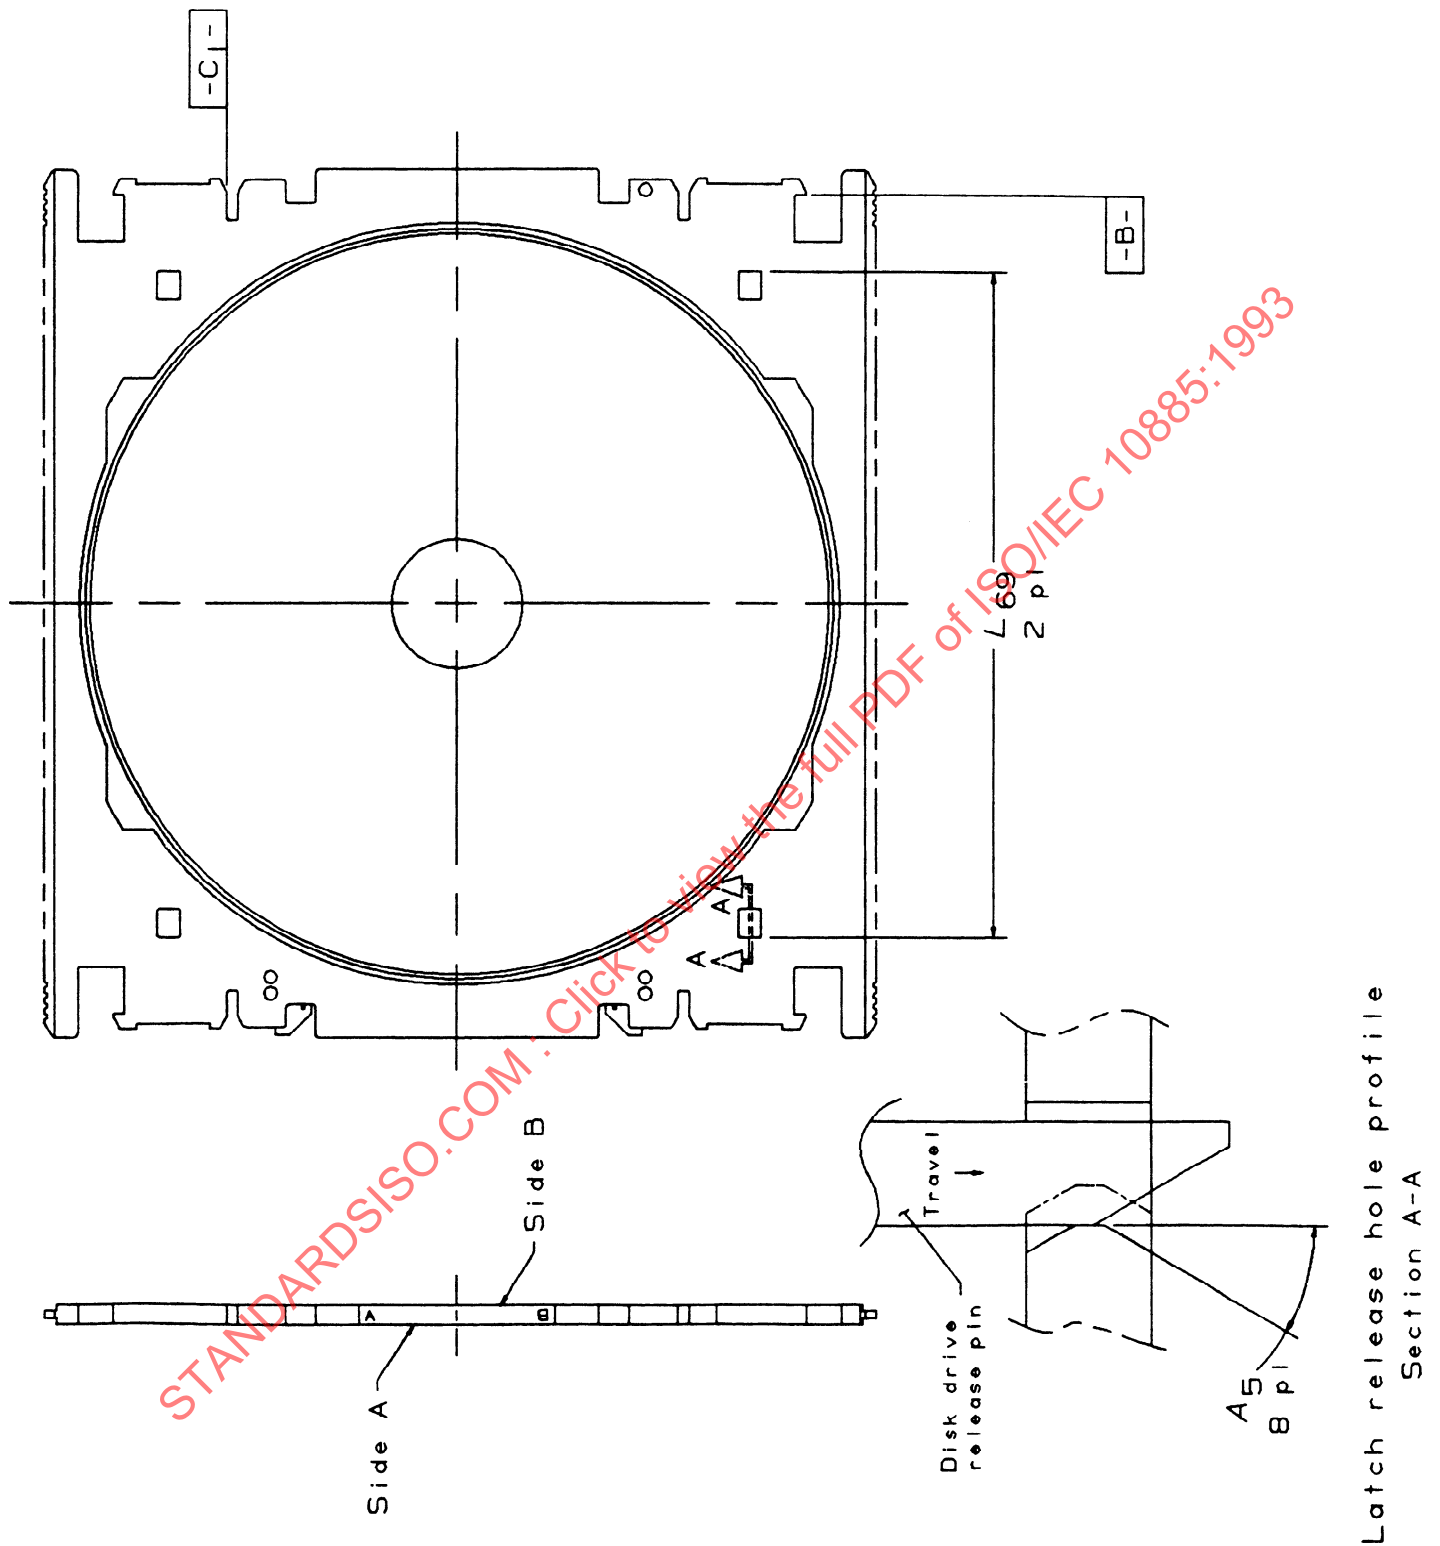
Unlatched carrier latch release hole location (with disk released, mounted and clamped on spindle)
